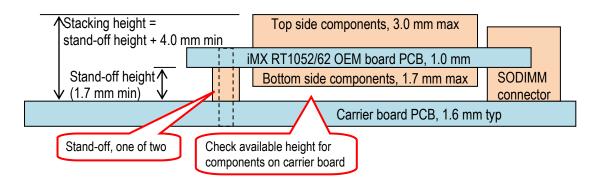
OEM Board Mounting in DDR SO-DIMM Connector, Stacking Height
